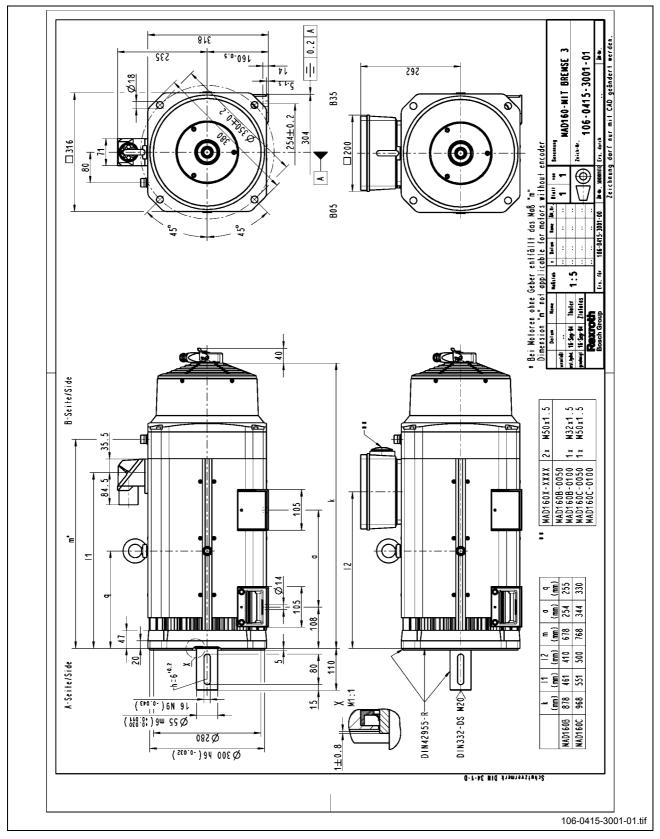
Dimension sheet for MAD160, with brake 3
